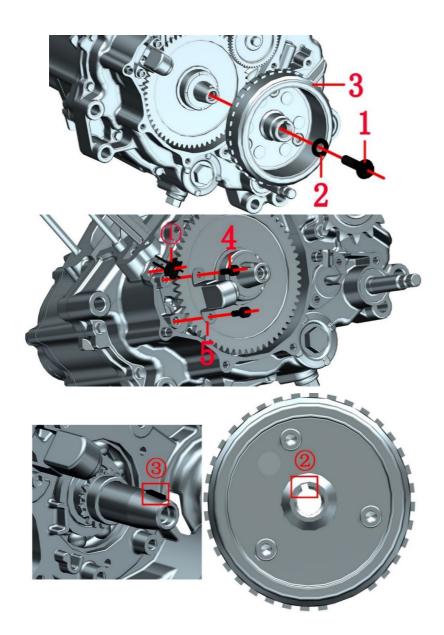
LEFT CRANKCASE		ZT158MJ magneto rotor, crankshaft position sensor	CHK
